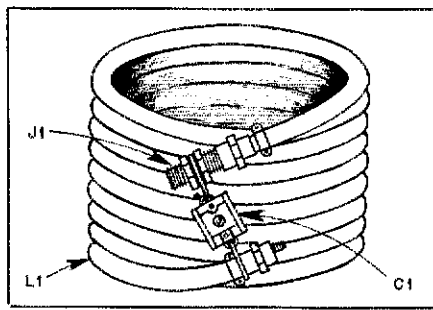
The compact breaker loop assembly. Construction of the assembly is discussed in the text.
